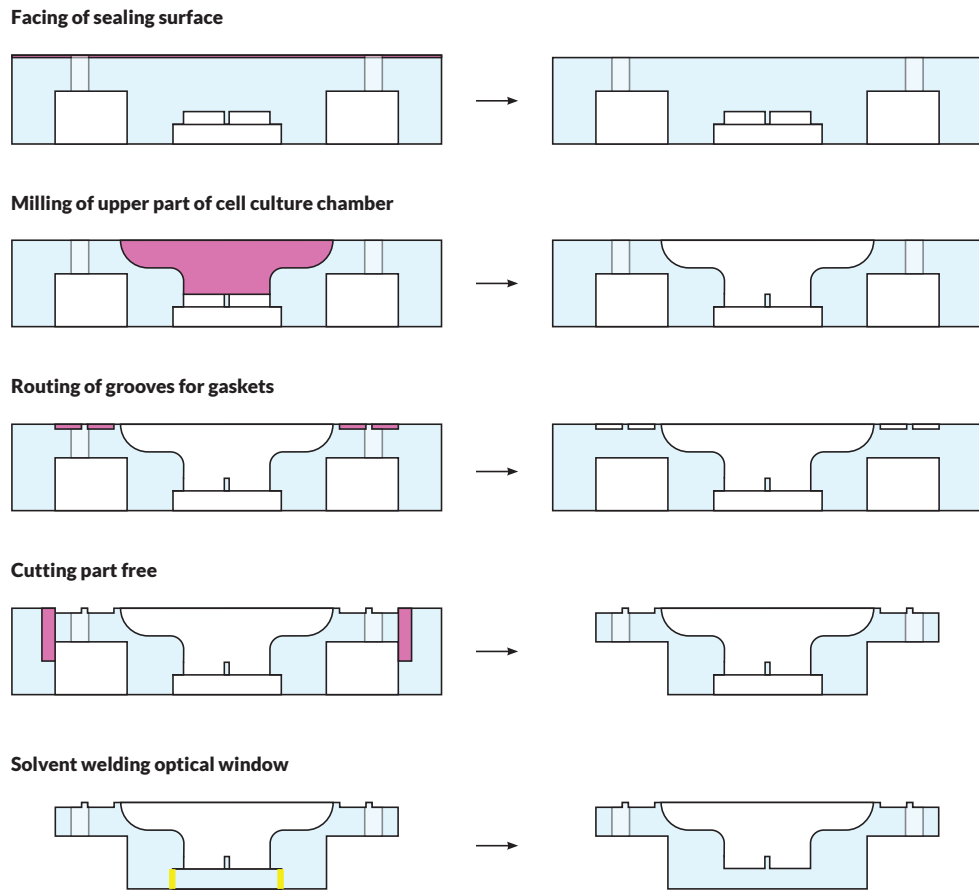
Obverse milling operations for fabrication of organoid culture device well sub-component The obverse side is faced to leave a clean and dimensionally accurate top surface for sealing. The cell culture chamber is milled to join the organoid wells milled from the reverse side. Grooves are routed for gaskets. The part is then cut free of the additional material which had been left to support the part during the obverse milling operation. Finally, an optical window which had been routed separately from stock is solvent welded into the previously left pocket, sealing the bottom of the well with an optically clear window for microscopy.
